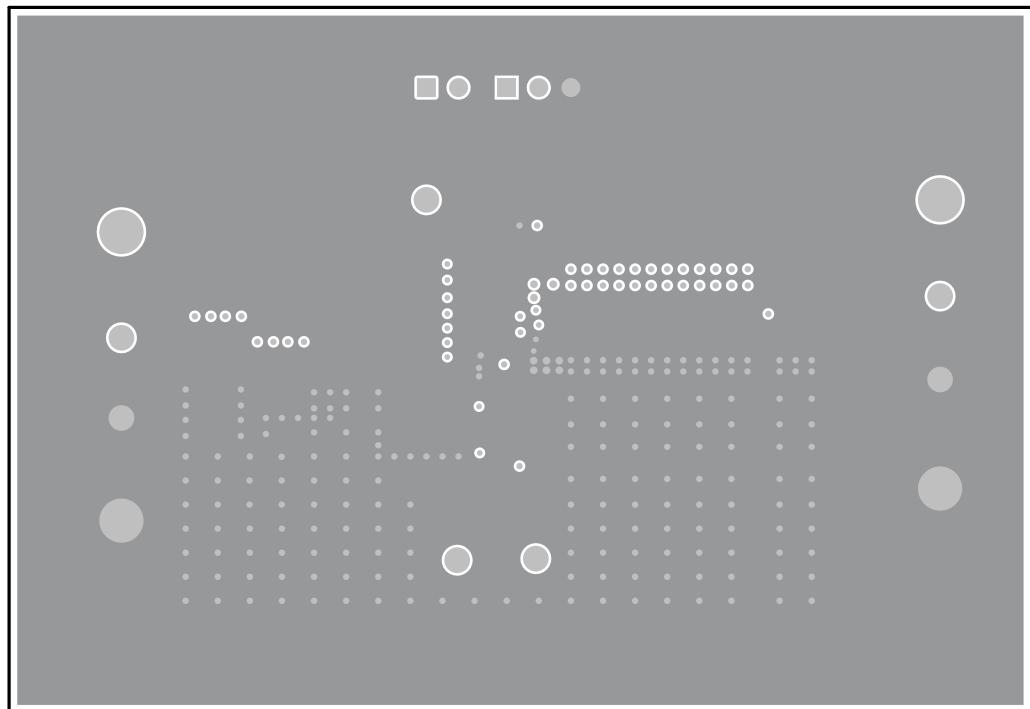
TPS61288EVM-064 Inner Layer1 Layout
